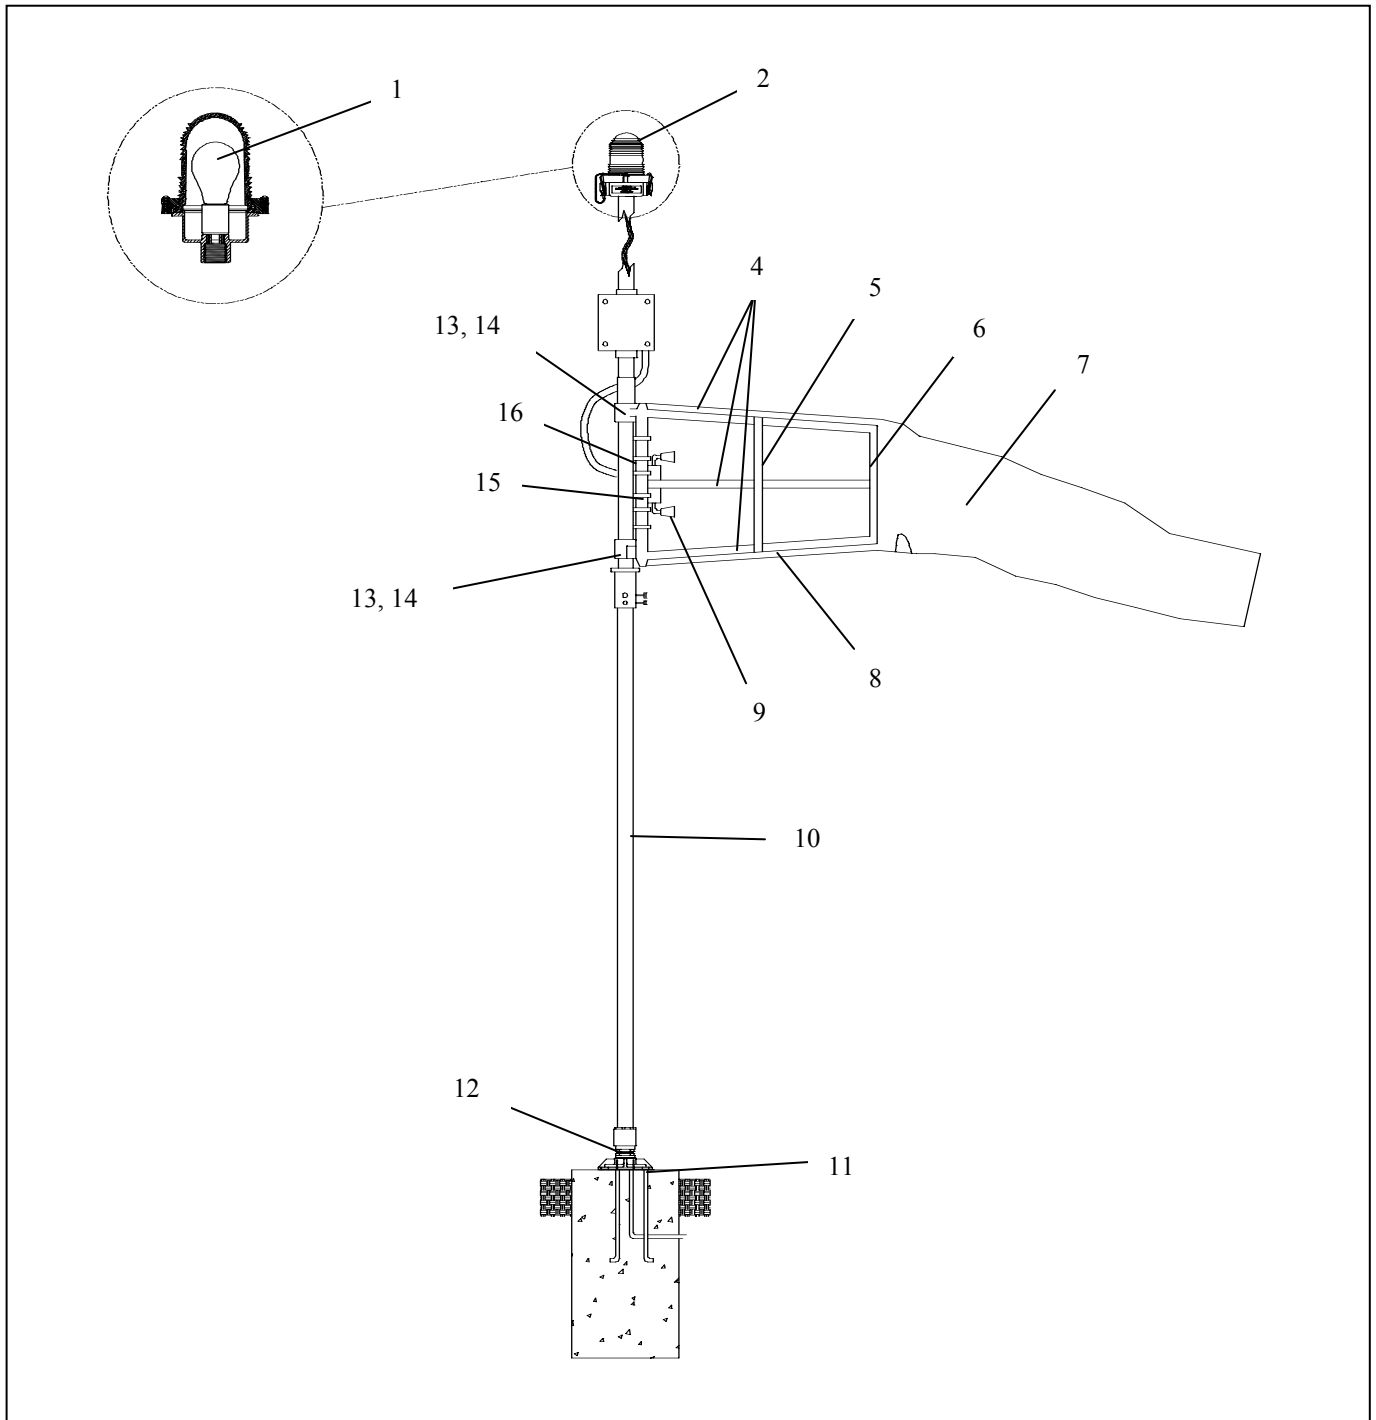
L-806 Wind Cone (With Internal Lighting Assembly)
